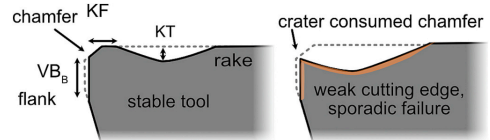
The change in rake angle due to crater wear. Severe crater wear leads to the chamfer being consumed. Creating a positive and weak rake angle. Leading to sporadic failure. KF should be monitored in addition to VB_B and KT .
